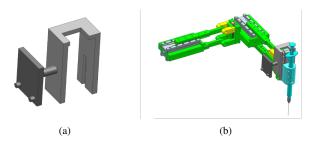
(a): Mechanical deign for holding imu. (b): Assembled imu device on robot.
